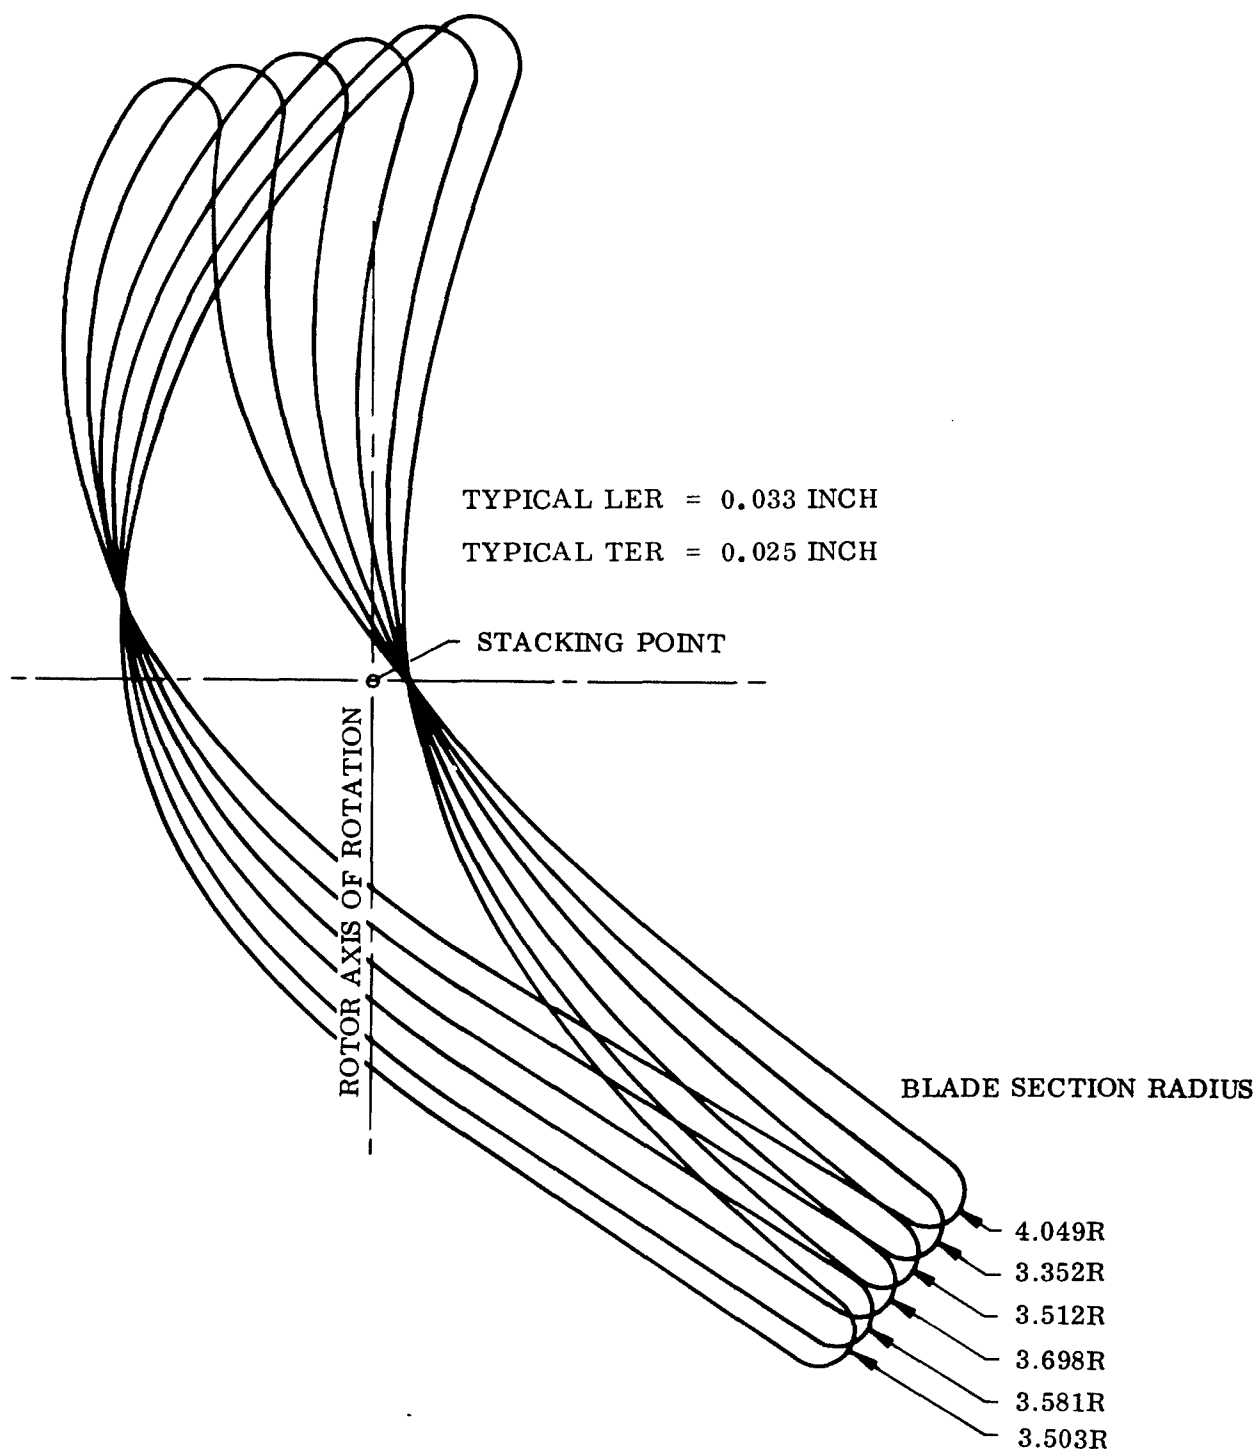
Fluid-Cooled Rotor - 34 Blades.
